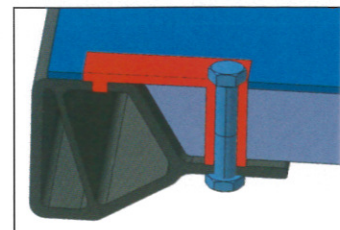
Cross-section of a possible connection of the sandwich with the honeycomb structure profiles in the floor area.
